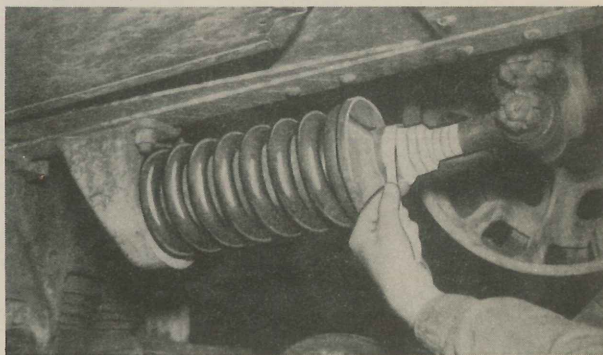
Finish by smearing a light coat of Thin Film Rust Preventive Compound, AXS 673 on the screw threads and replace the cover or protective wrapping.
